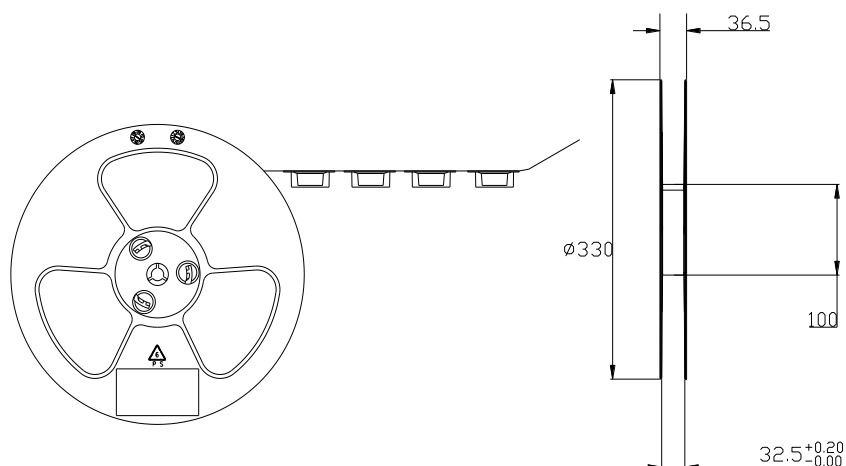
Dimensions of reel for 250pcs (Unit: mm)
